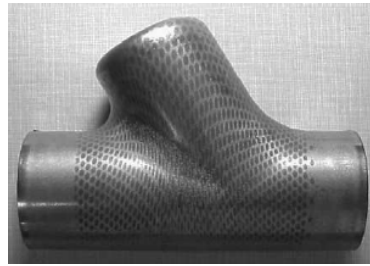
Y Shape Hydroformed made up of Stainless Steel [9]
